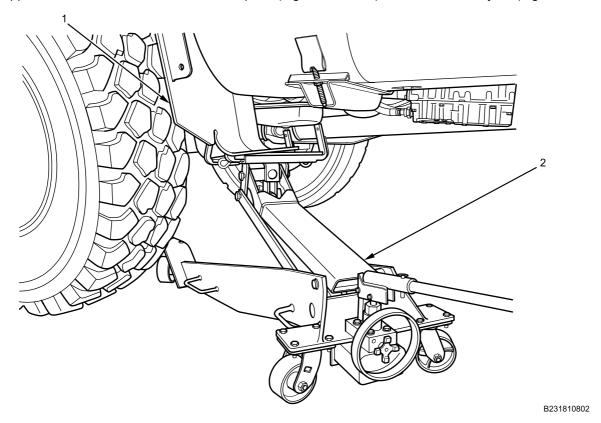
Lower Inner Wheel Deflector Armor Plate.
